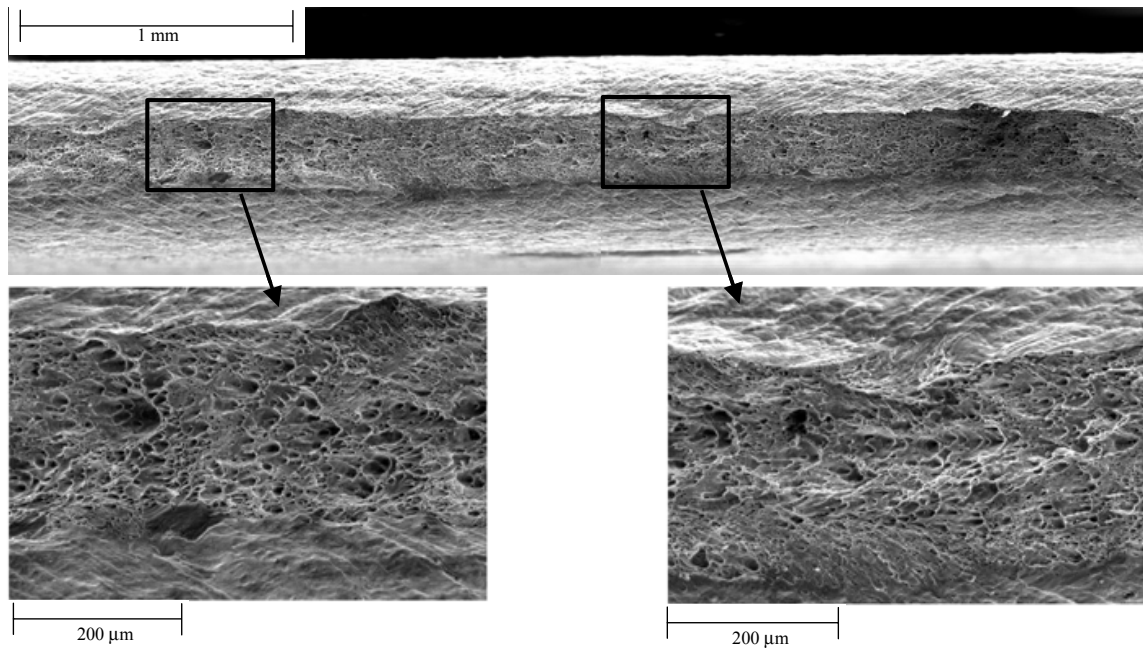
Micrographs of a) the “saw tooth” and b) the tip fractures present in AA6111 samples formed with the 45° die.
